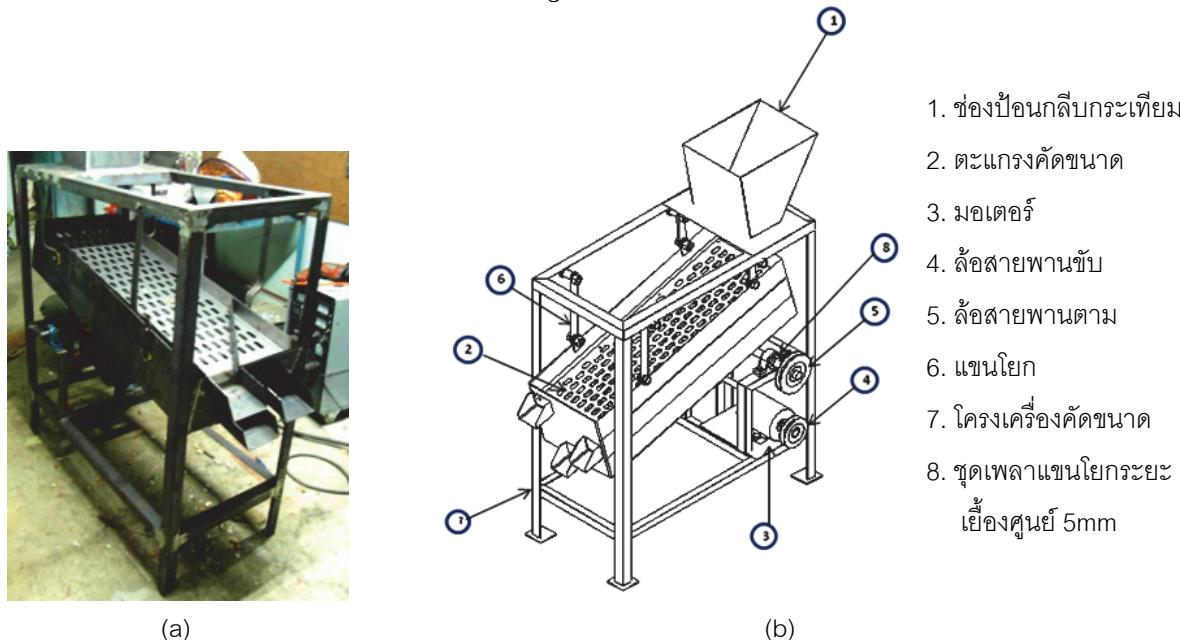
a) Prototype and b) drawing of garlic clove sizing machine
